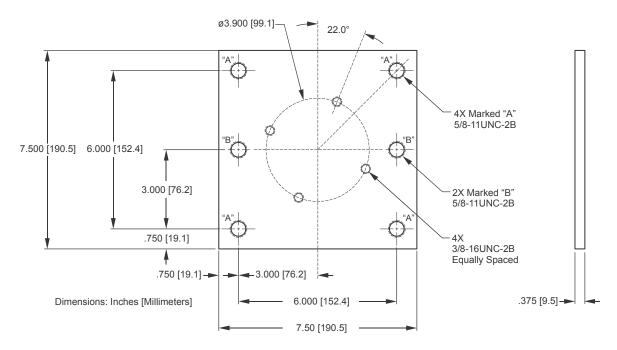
Mounting Plate Dimensions 1K - 10K
